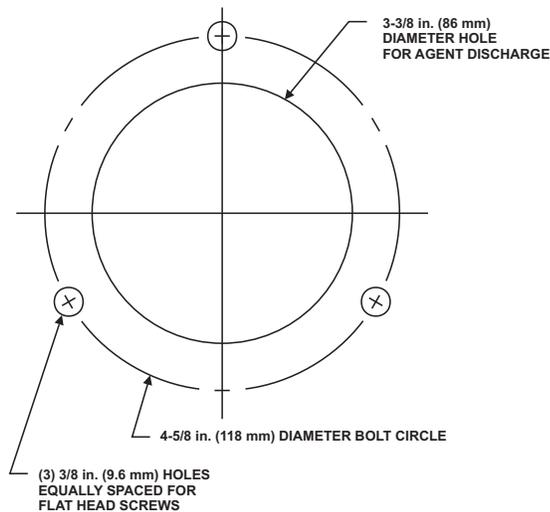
Flanged Nozzle Mounting Kit (Duct or Enclosure Mounting)
